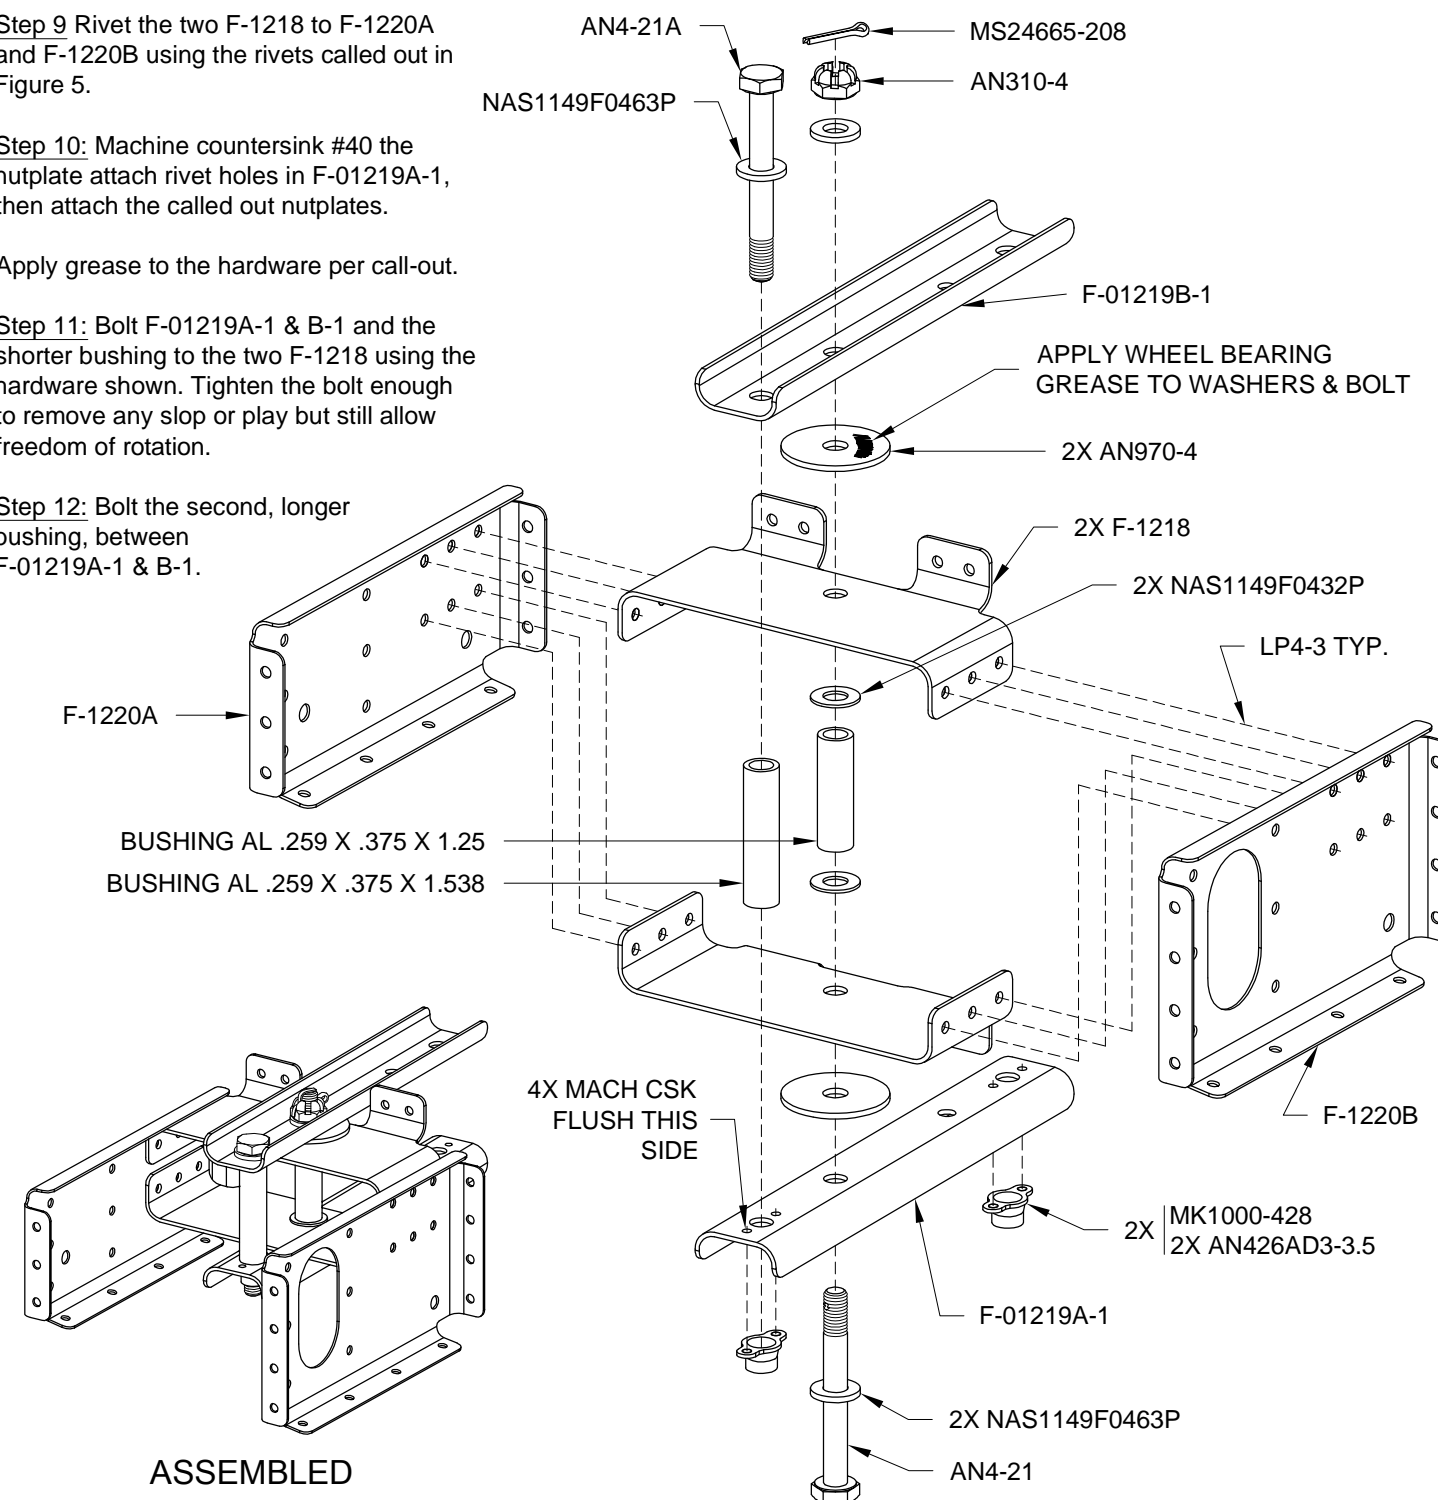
ASSEMBLING FLAPERON MIXER ARM
